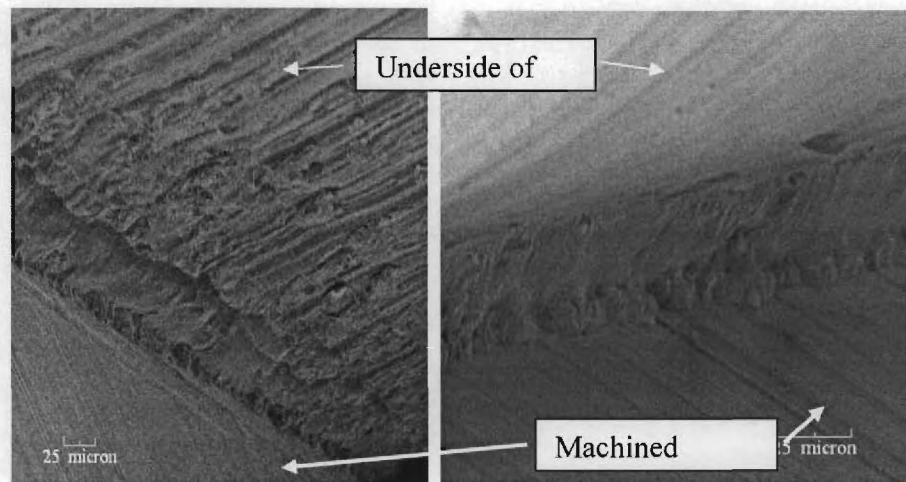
Evidence of ductile tearing ahead of tool tip (left: 30 deg rake; right: 70 deg rake angle)
